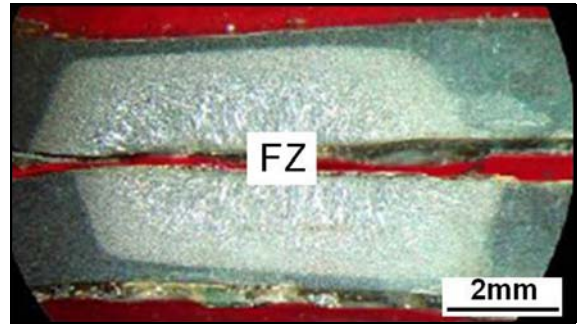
Crack propagation through weld fusion zone in interfacial failure mode.
